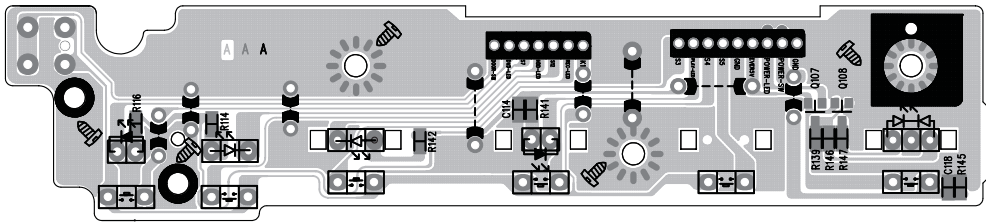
EU03B Front (L) PC Board (Bottom side)
